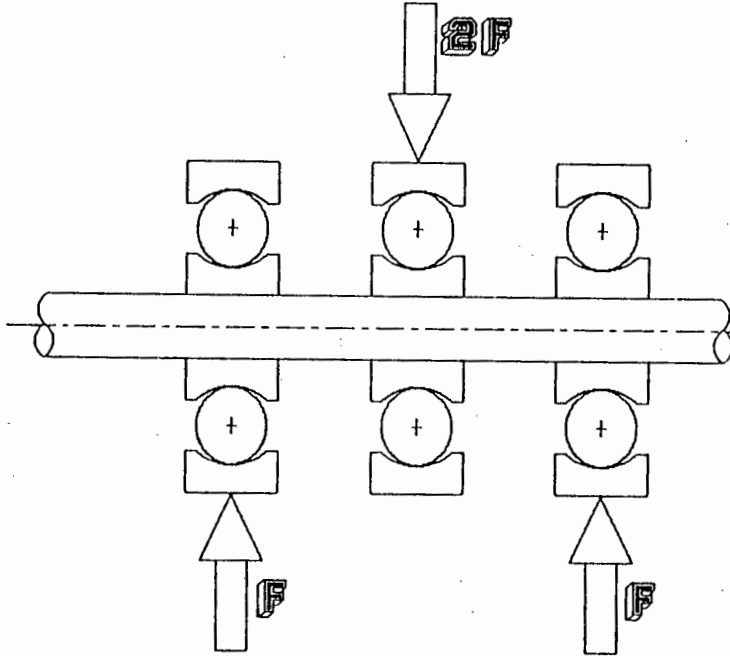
THE BEARING LOADING ARRANGEMENT
